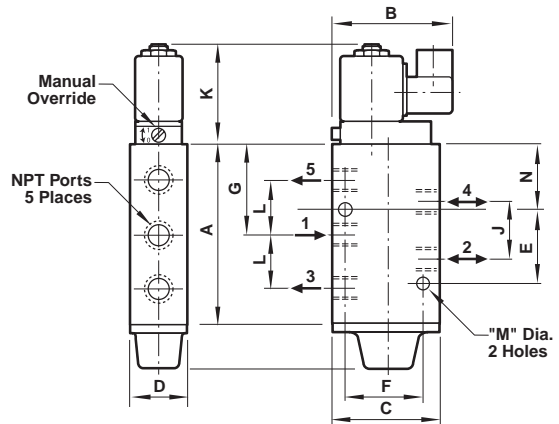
1/4" - 1/2" valve solenoid spring return
